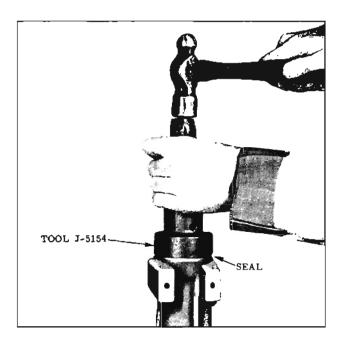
Installing Rear Bearing Retainer Oil Seal
